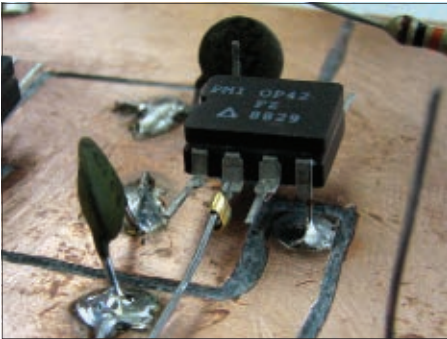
D. Assembly is held tightly and is ready for a touch of solder.
